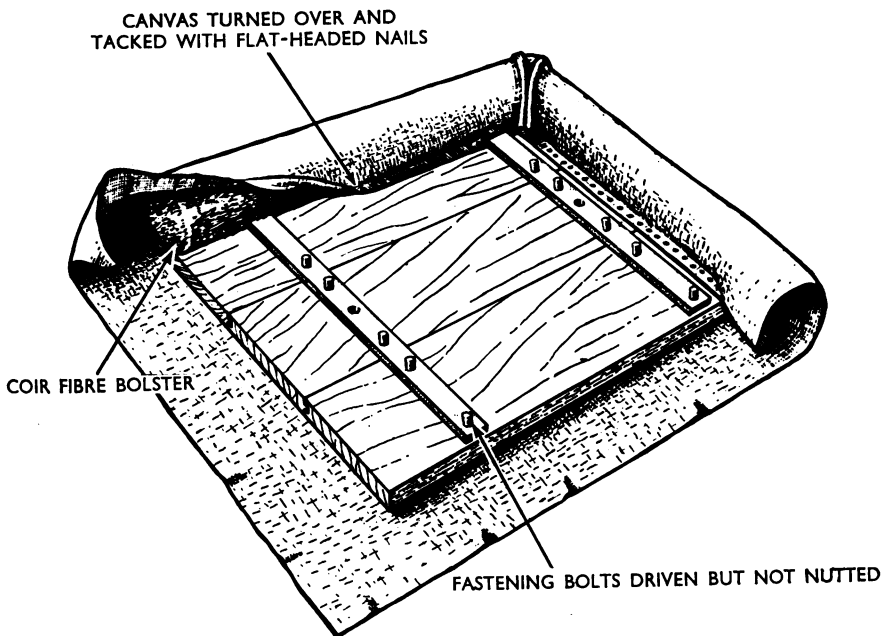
Constructing a simple wooden pad for patching a small hole—second stage
